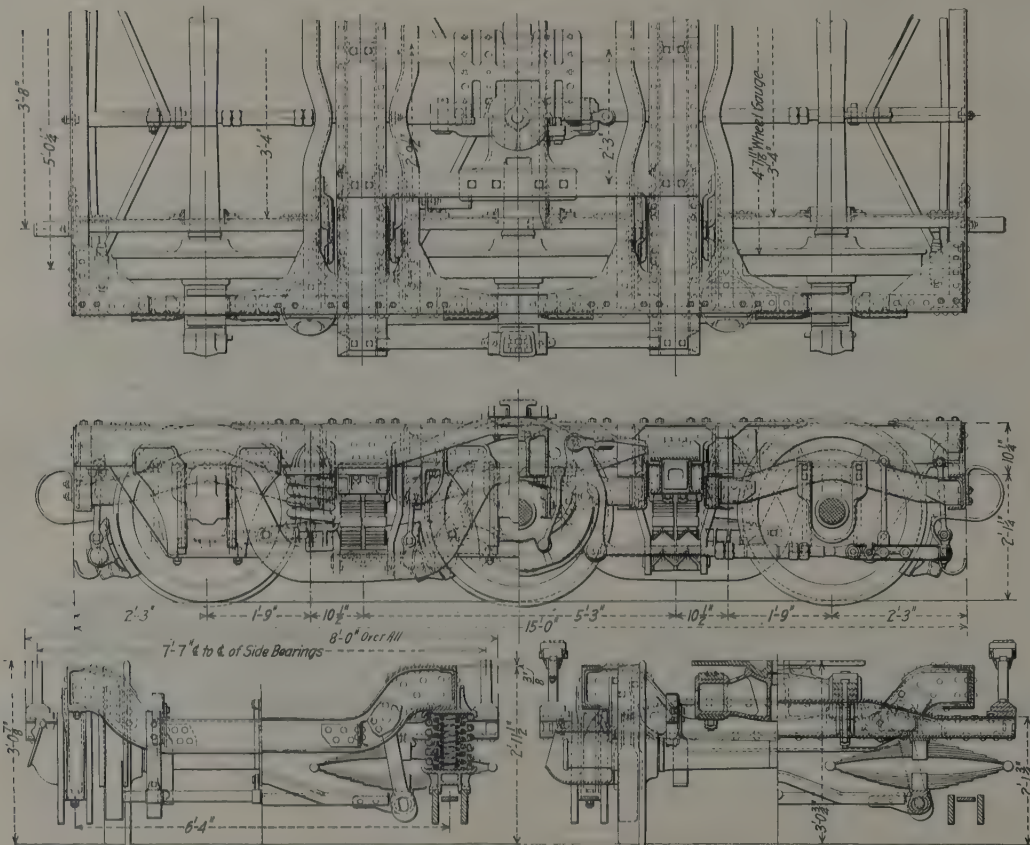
Six-Wheel Steel Truck. Standard Steel Car Company.
